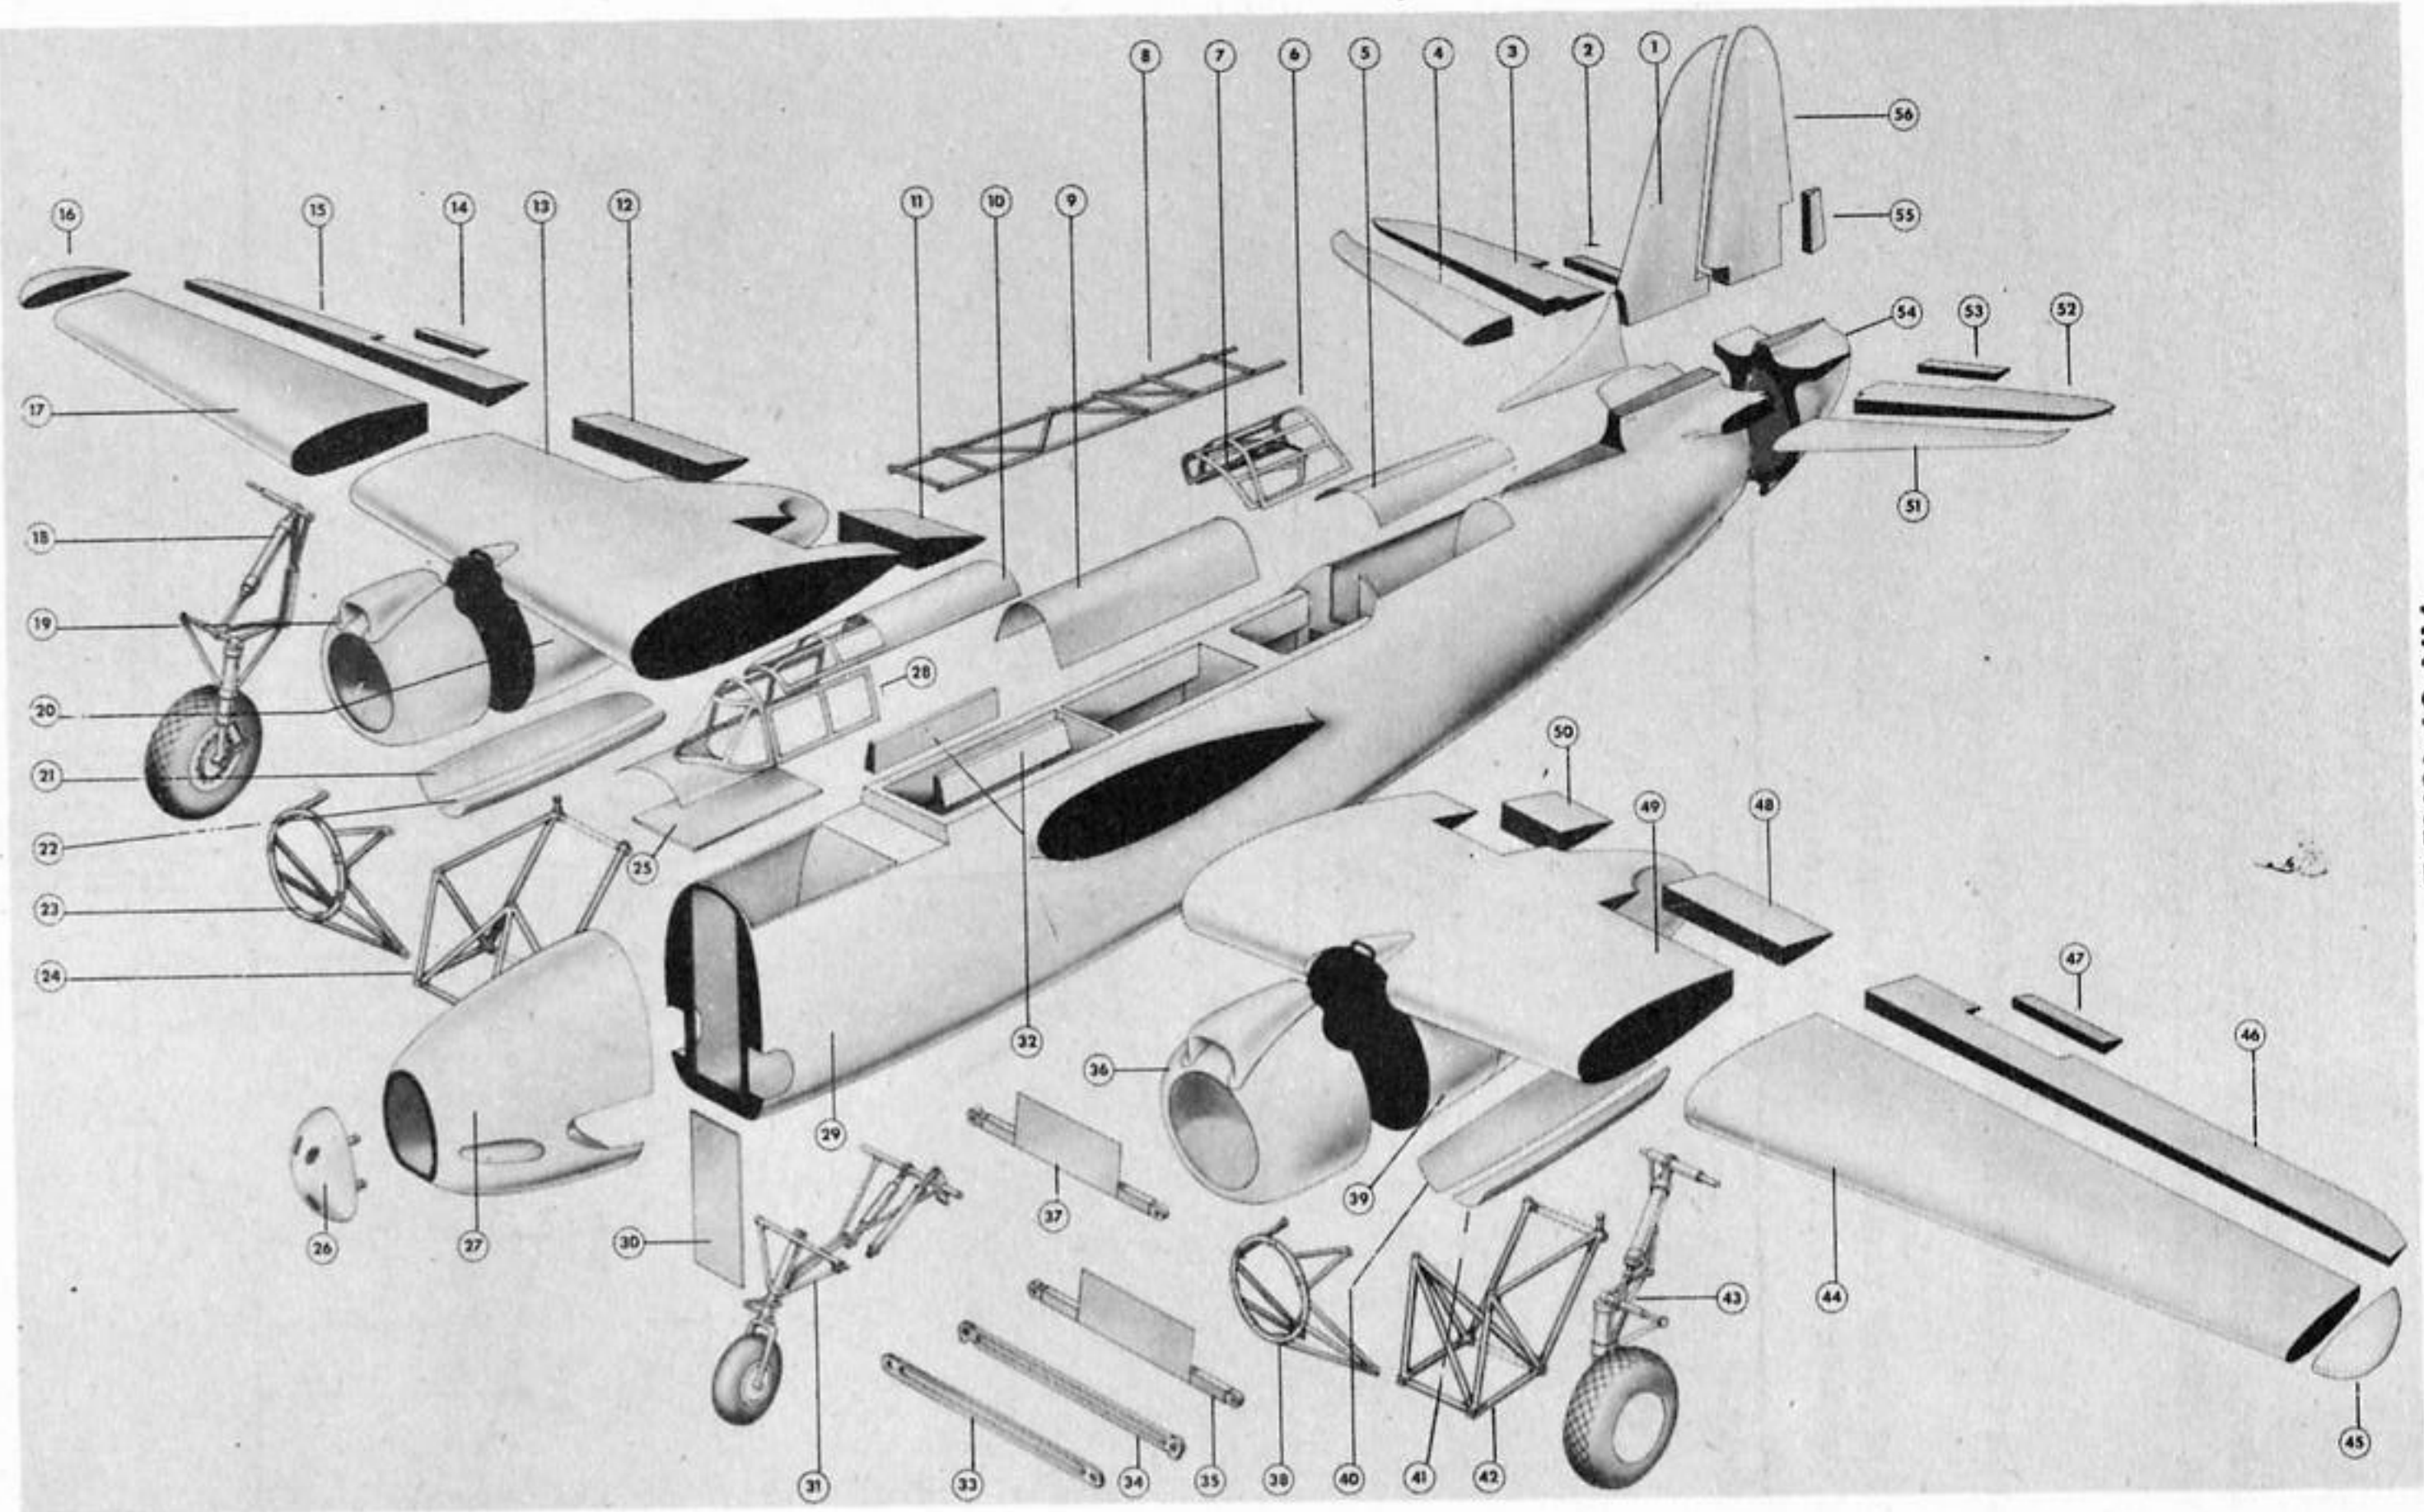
EXPLODED VIEW OF MAJOR ASSEMBLIES
